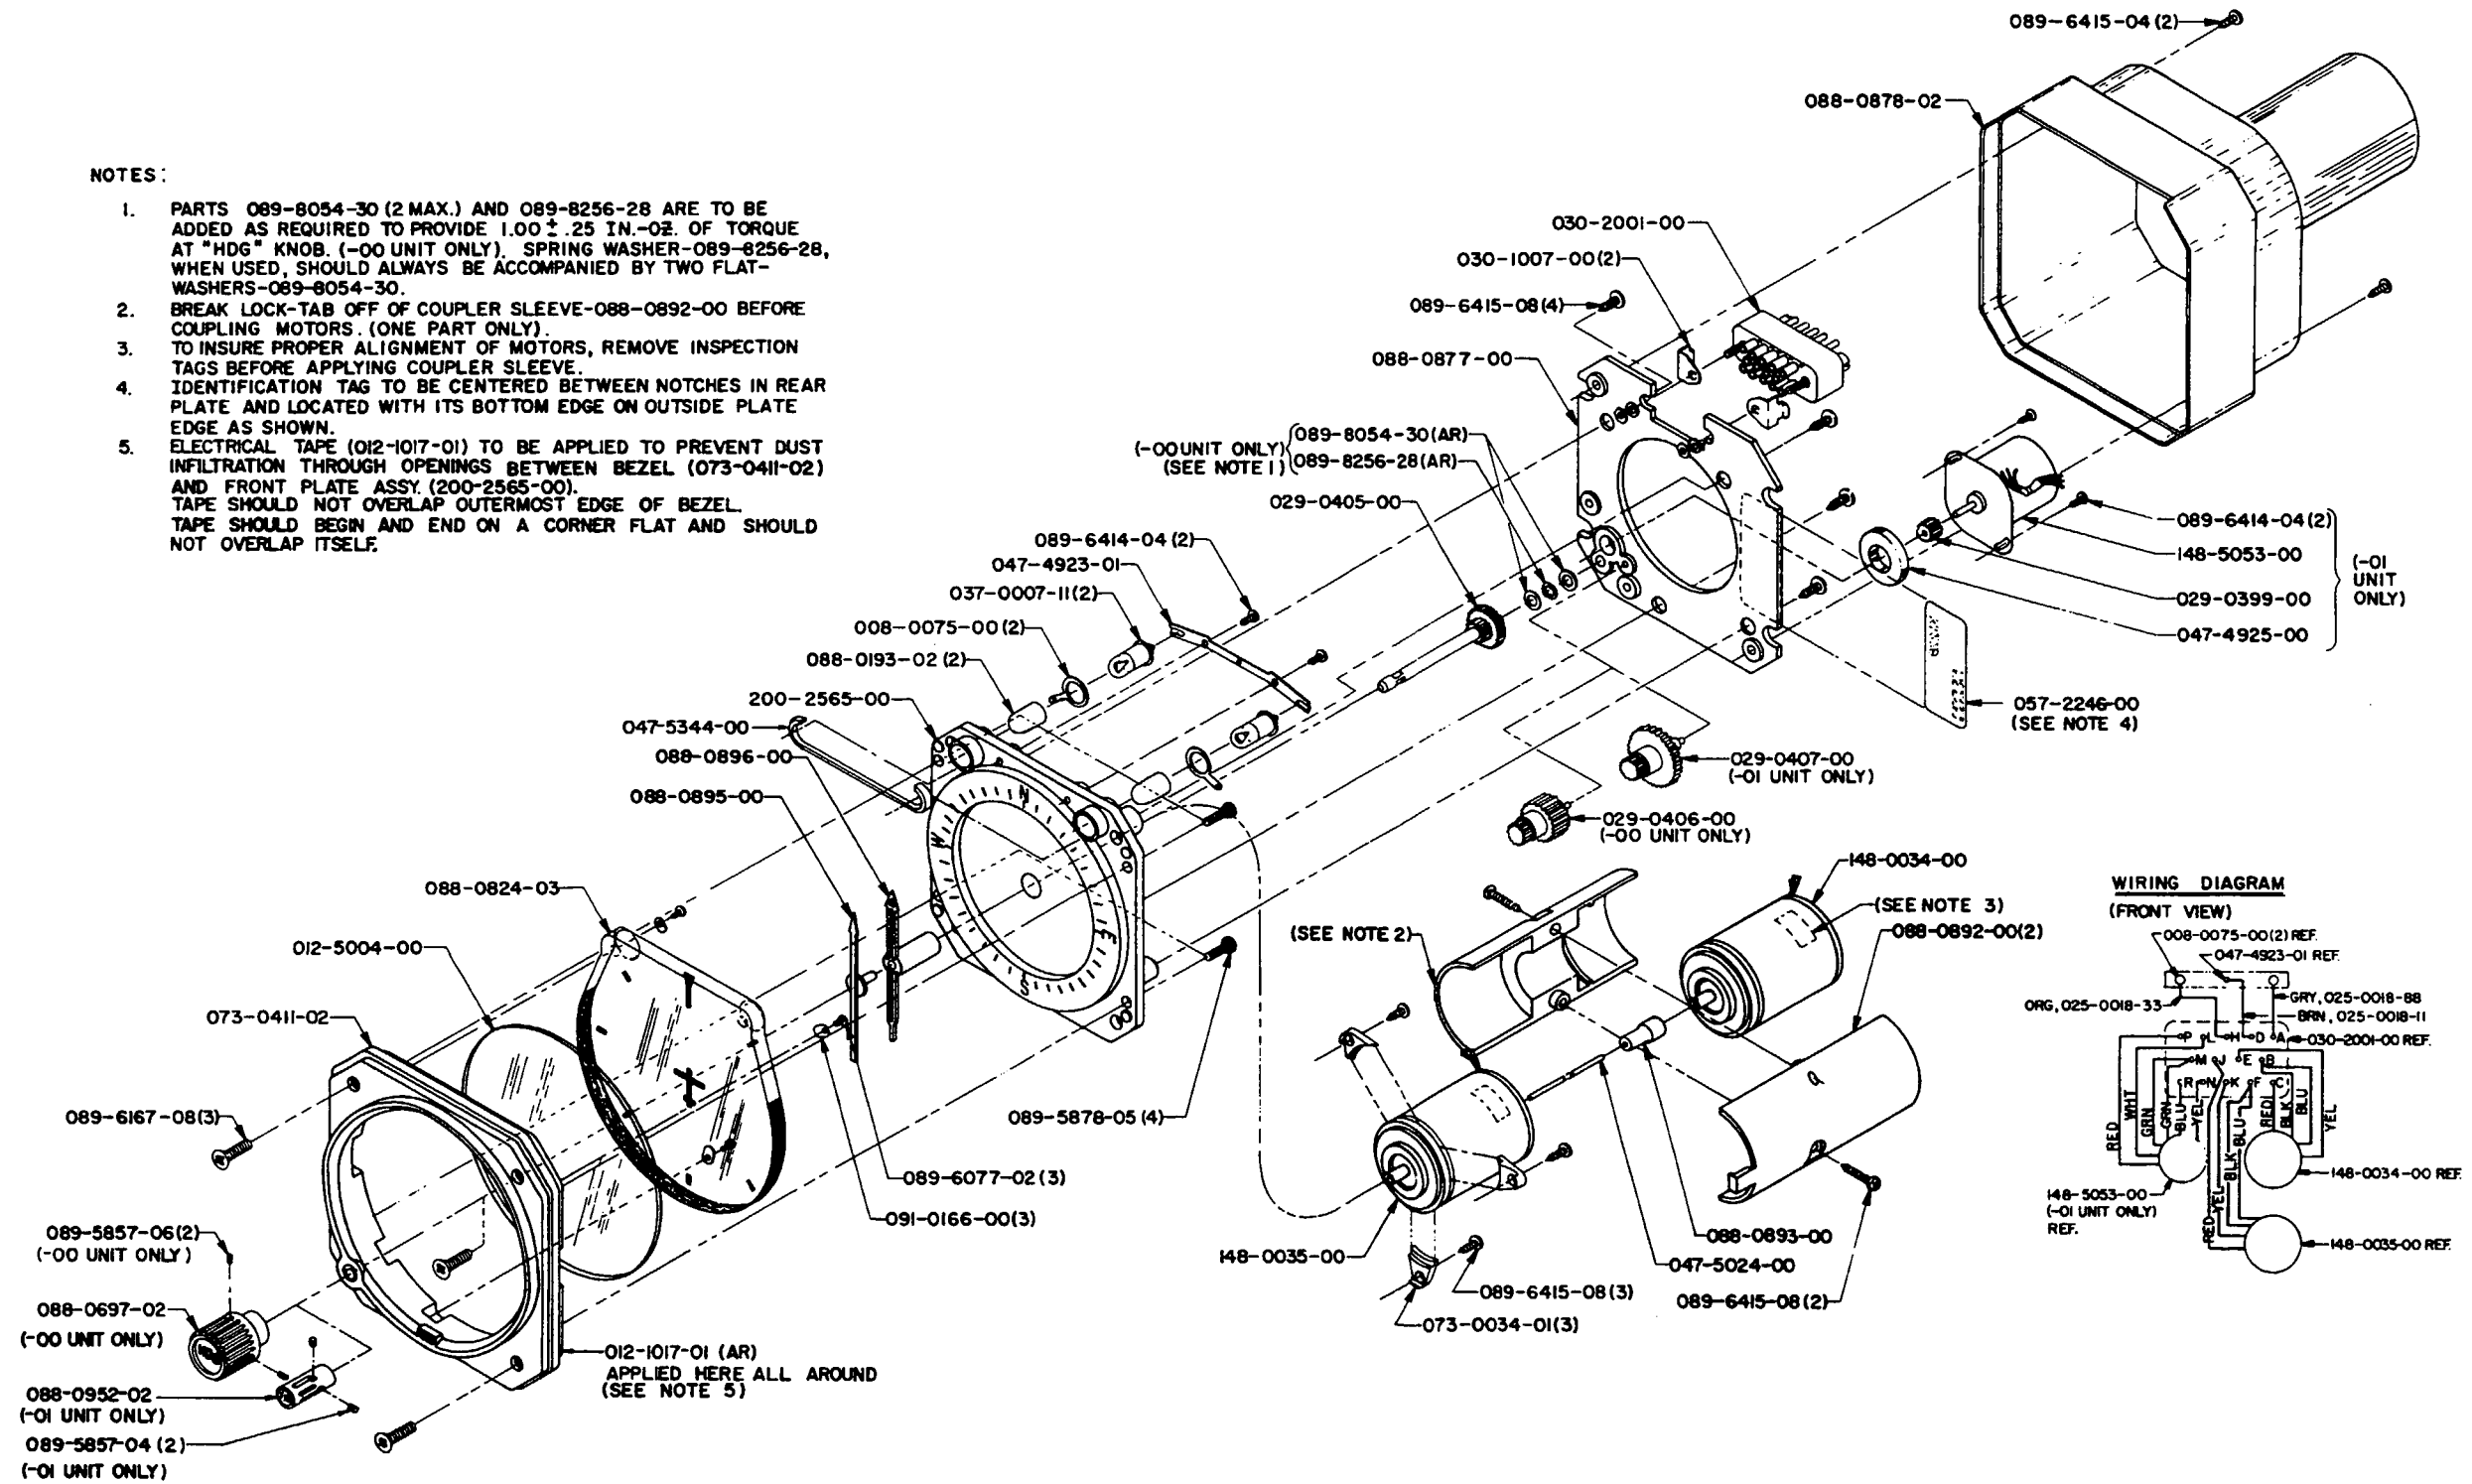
B KI 228 FINAL ASSEMBLY
